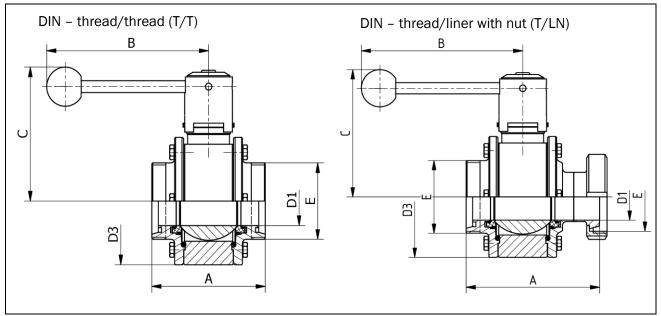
Ball valve with handle: Connection variants: thread/thread, thread/liner with nut
